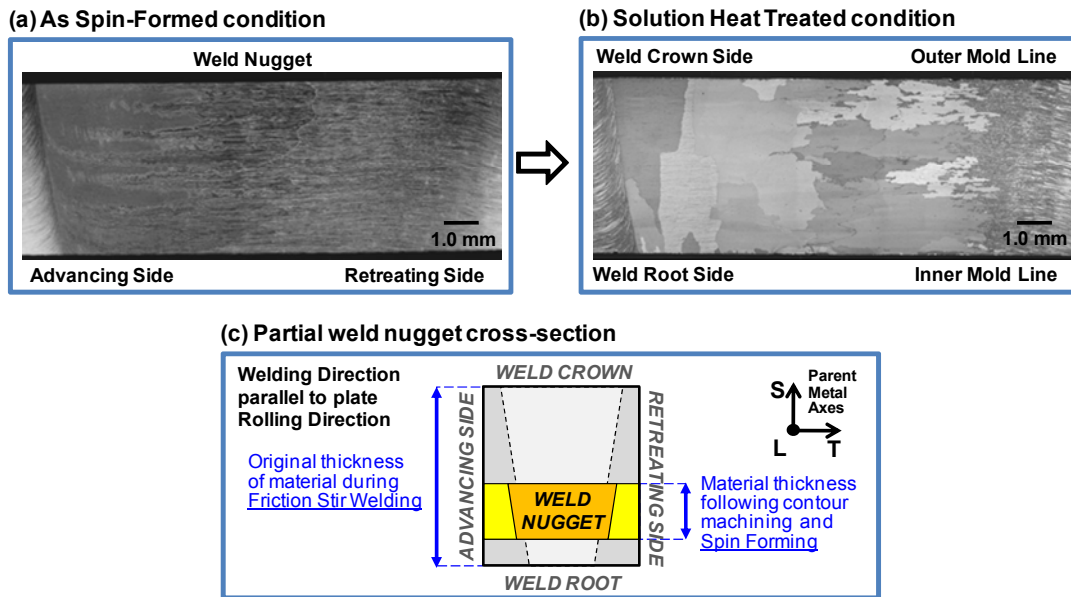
AGG in a deformed weld nugget during standard T8 processing of Al-Li 2195: (a), as spin-formed condition; (b), solution heat treated condition; (c), schematic of friction stir weld cross-section remaining after contour machining and spin forming operations.
